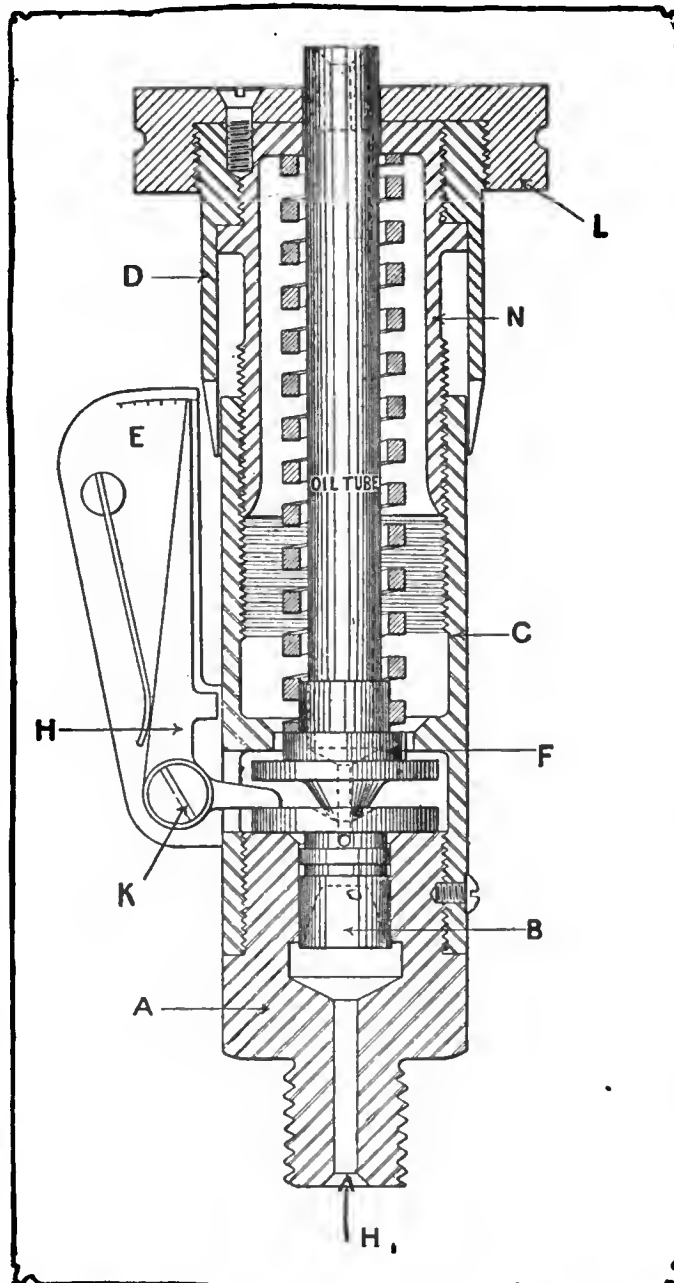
Section through the O'Kell Indicator, showing the method of operation
